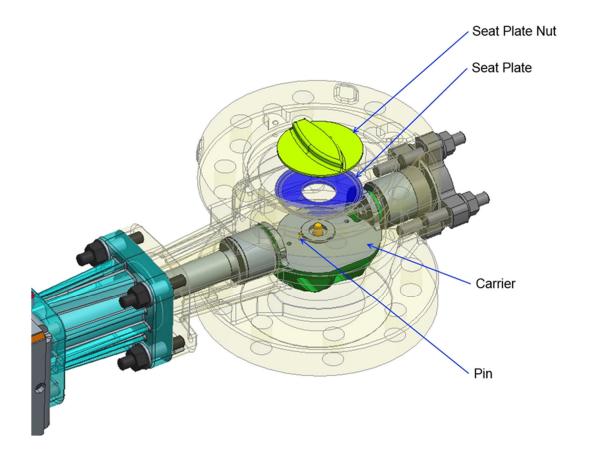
Reposition the Valve Assembly, Orient the Seat Plate
